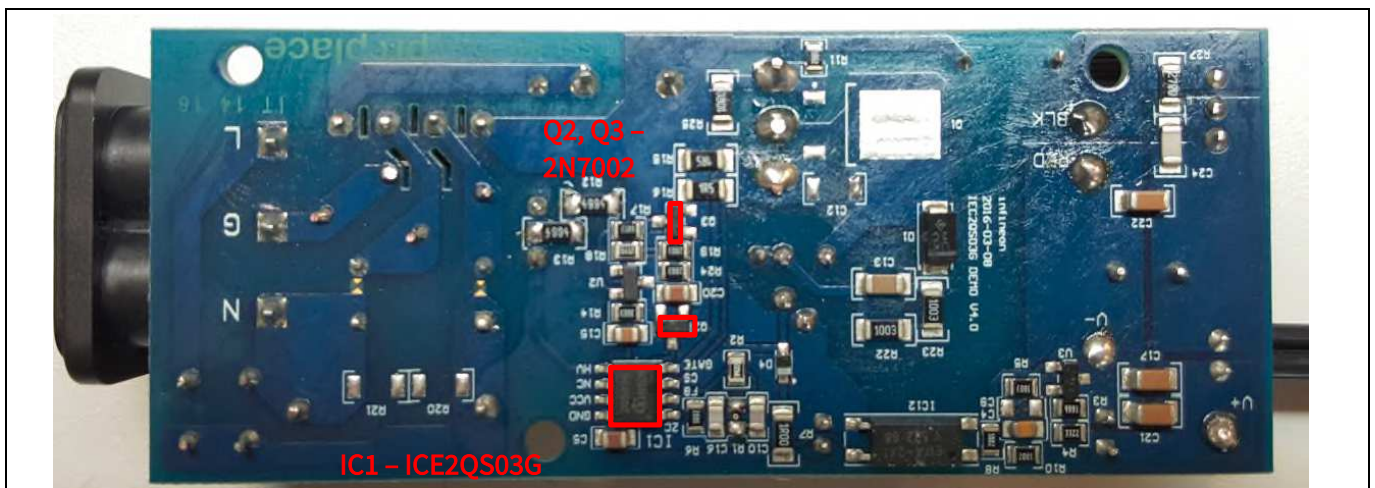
Bottom side of 45 W IFX adapter highlighting Infineon components. The Q1 DPAK is not populated on the bottom side since the board is populated with a FullPAK device.
